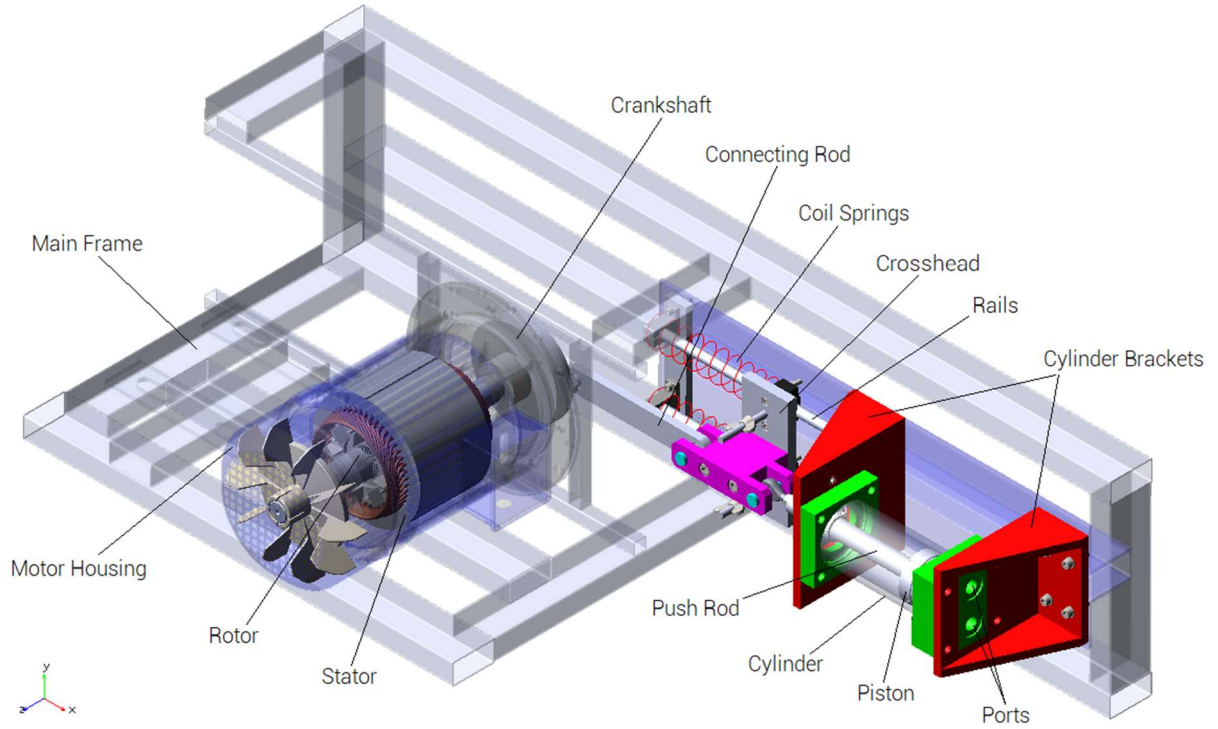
CAD-MBD model of the reciprocating compressor prototype. Electric motor is adapted from [32].
